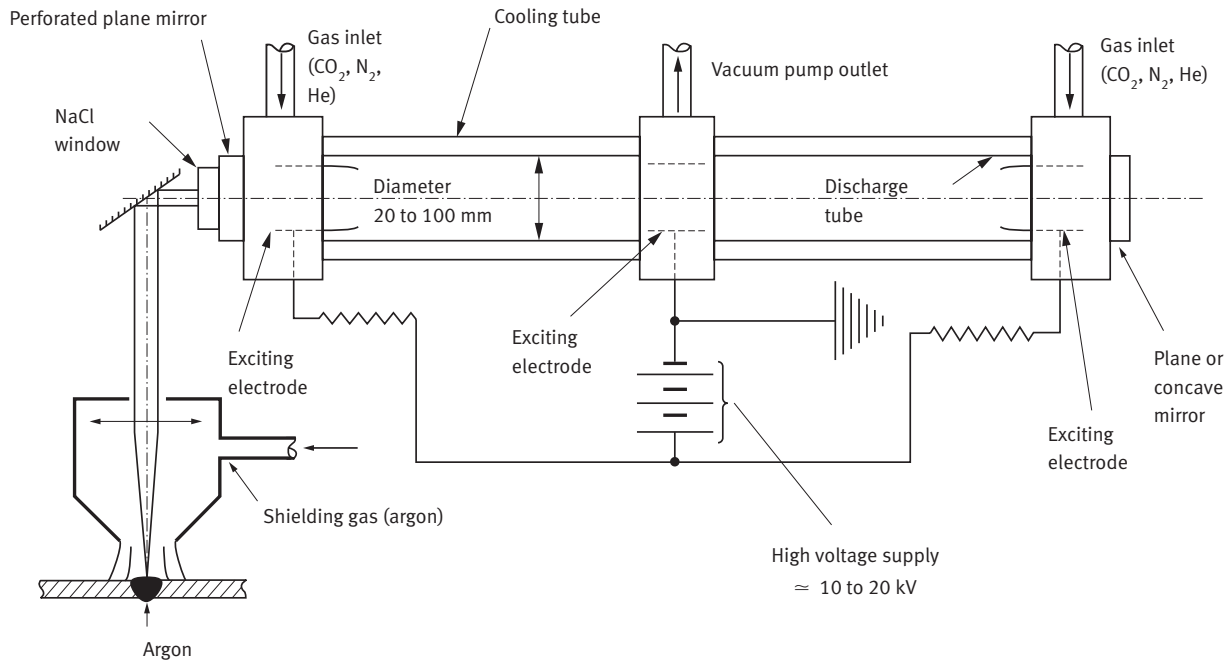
Principle of a CO_2 (CO_2 , N_2 , He) laser used for welding
